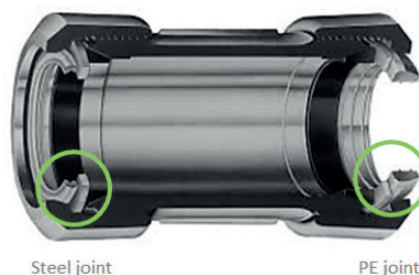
Compression fitting that joints a PE with a steel pipe
